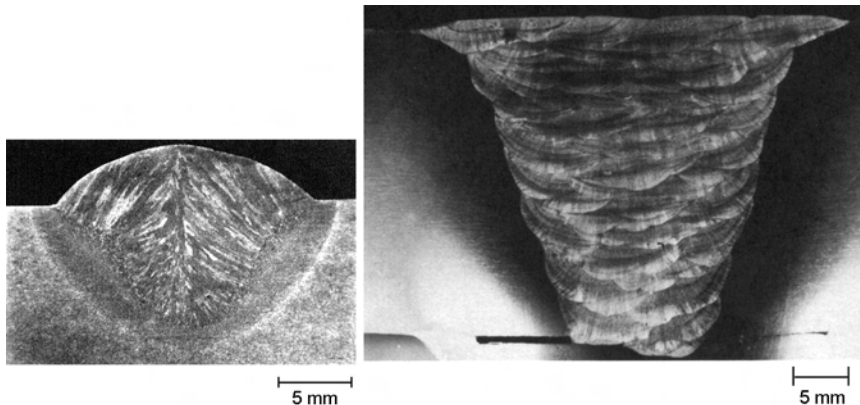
Weld microstructures showing the fusion zone, heat-affected zone, and base metal for (a) single-pass bead-on-plate weld in A-710 steel and (b) multipass weld in 304 stainless steel. Source: Ref 1.3
